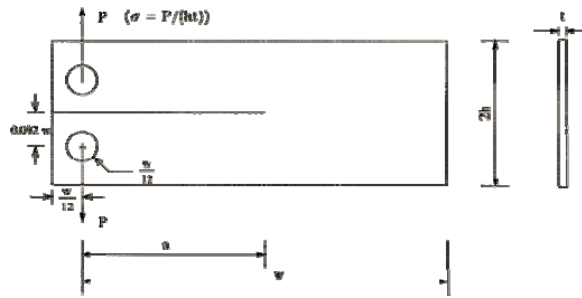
Geometry and dimensions of DCB specimens made in X52 steel.
